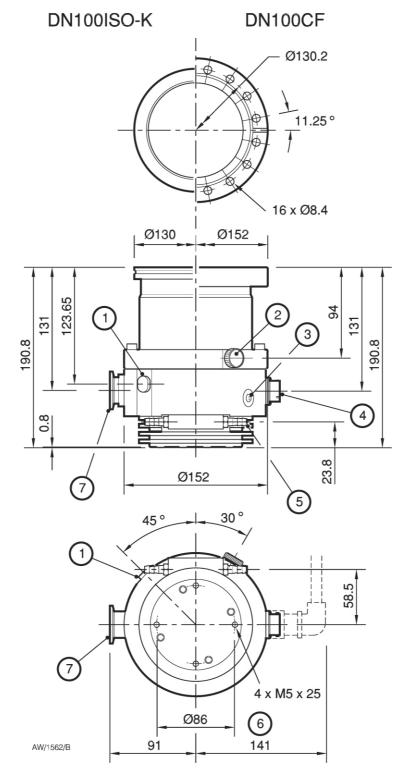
EXT250 Turbomolecular Pump dimensions (mm)
